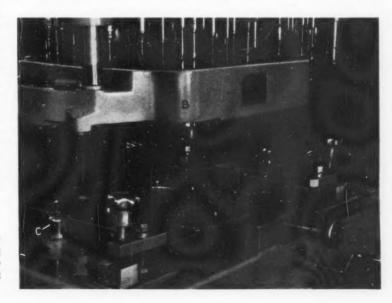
Close-up view of the jig, with a casting in position, on the Natco multi - spindle drilling machine
